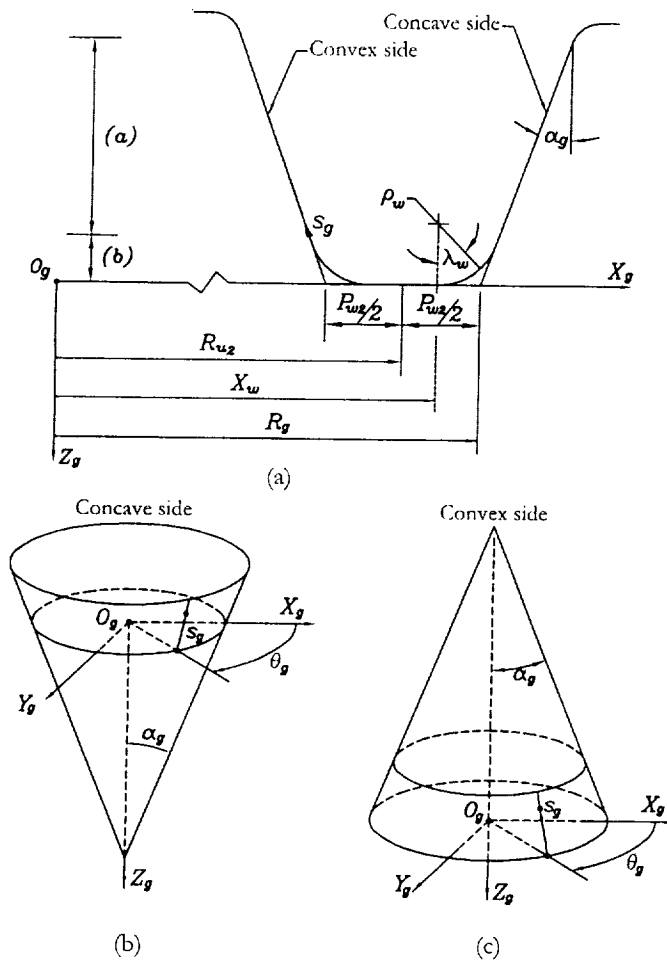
Blade and generating cones for gear generating tool: (a) illustration of head-cutter blade; (b) and (c) generating tool cones for concave and convex sides.
